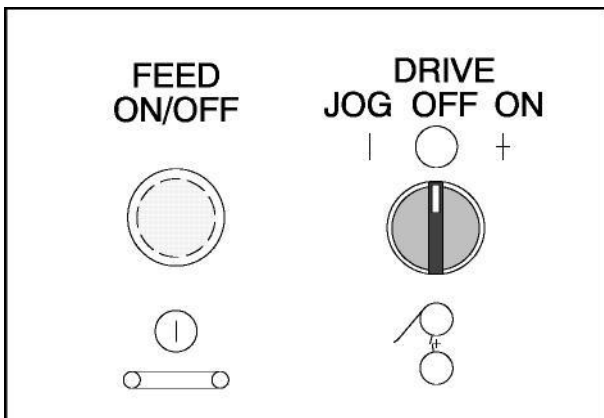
Jog Last Sheets Out of Machine and Turn Feeder and Drive Off
